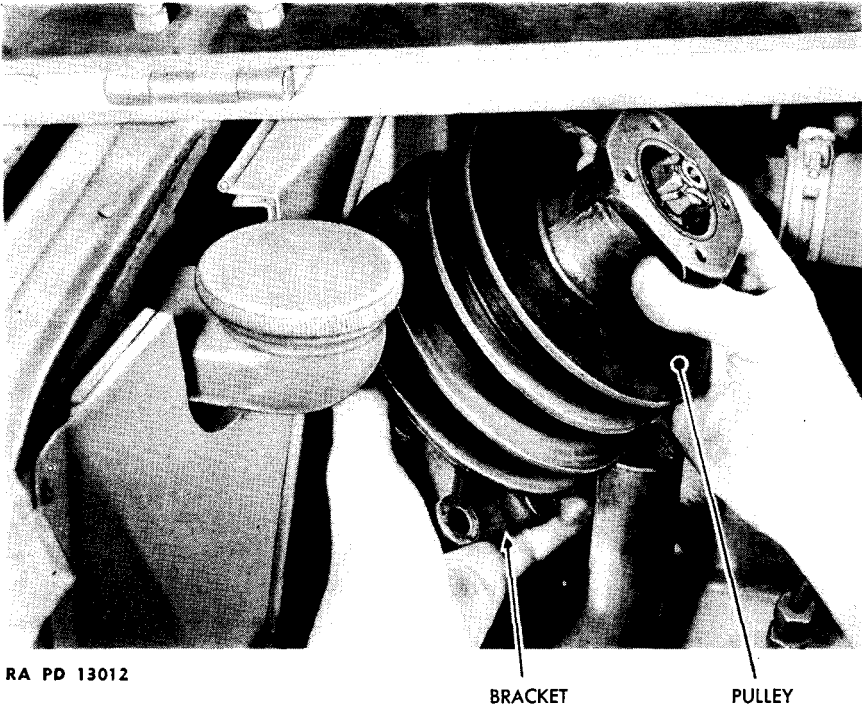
Removing Pulley and Bracket Assembly Holding Cap Screw - (Hercules Diesel)
